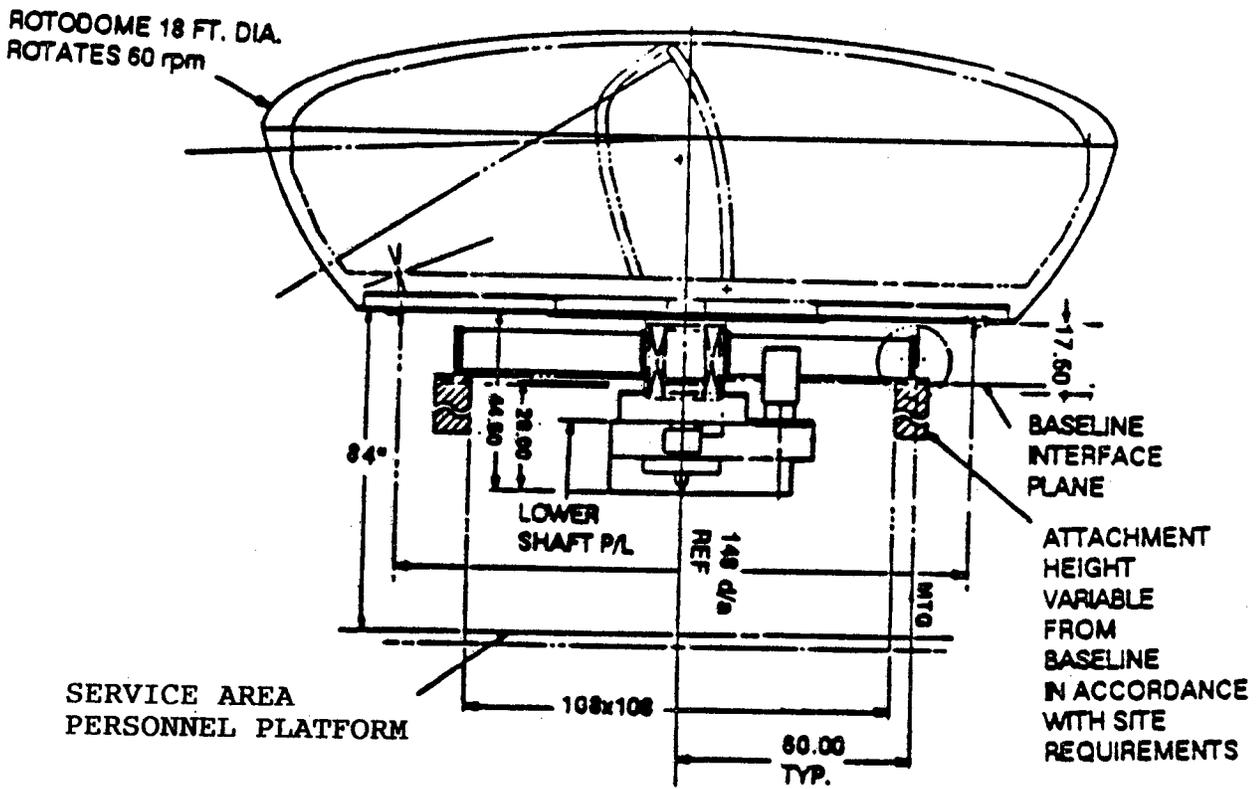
ASDE-3 Installation Outline Plan View
